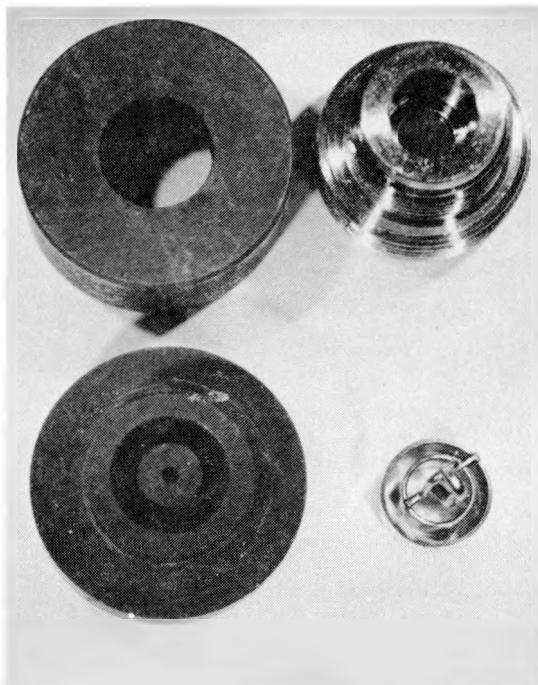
Metal parts and graphite fixtures used to fabricate component.
